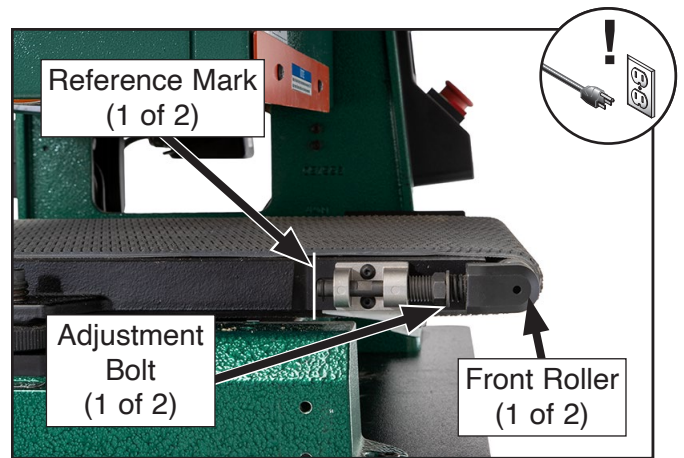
Location of adjustment bolt, reference mark, and front roller (left side shown).
